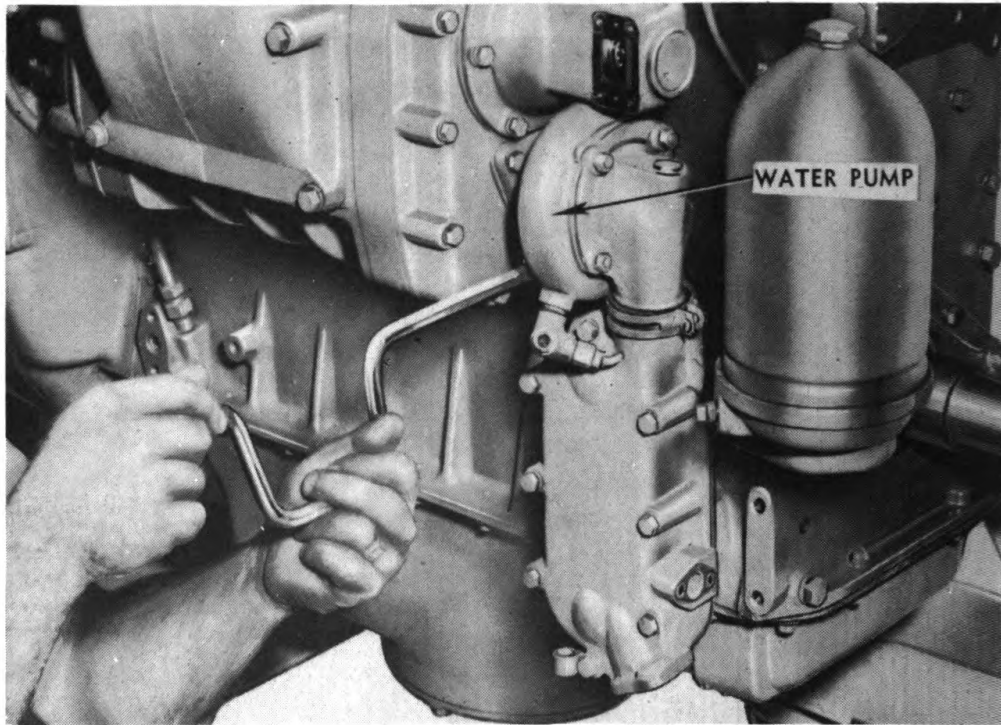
Blower Drive Shaft Retainer Ring Removal
